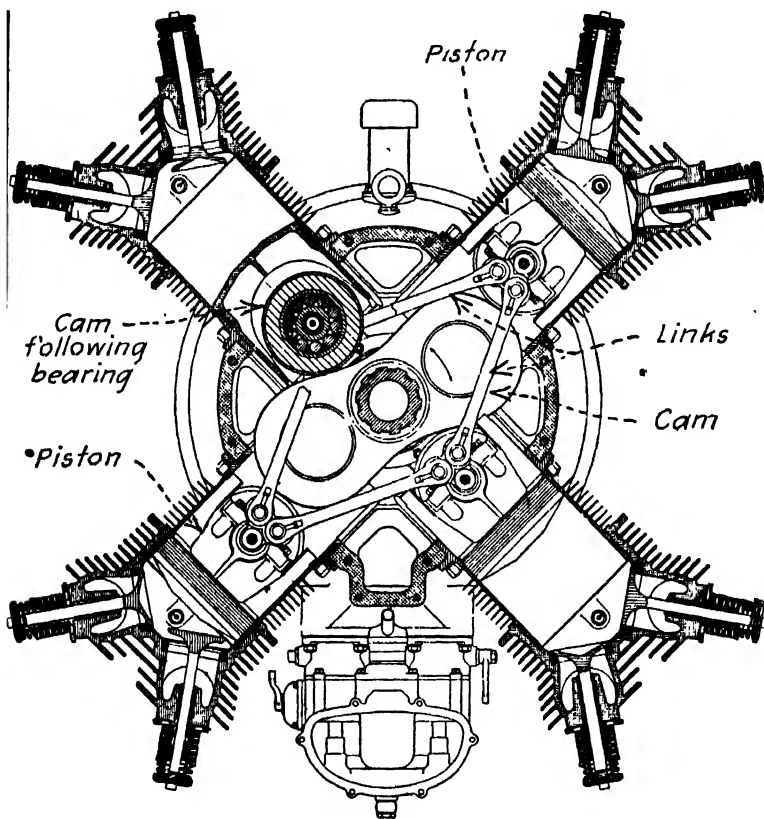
Plan Section Drawing of Caminez Engine that Uses Cam Instead of Crankshaft for Operating' Pistons.
